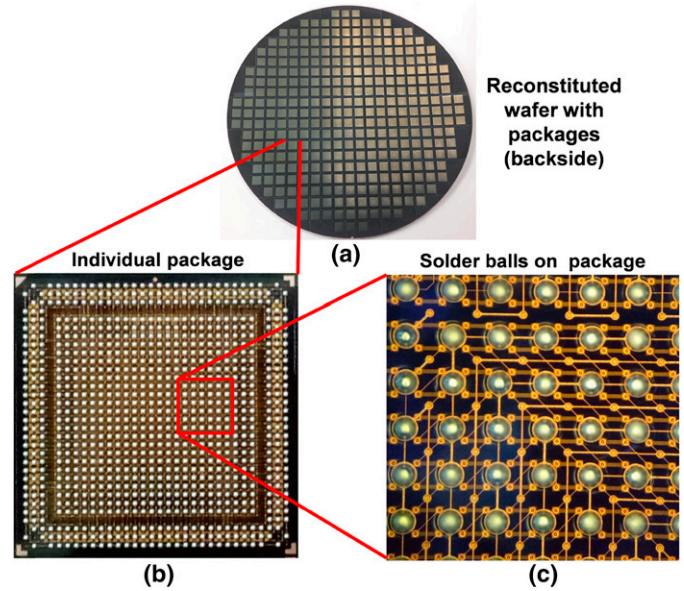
(a) Images of the fabricated reconstituted wafer. (b) Individual package. (c) Close-up view of the solder balls.
